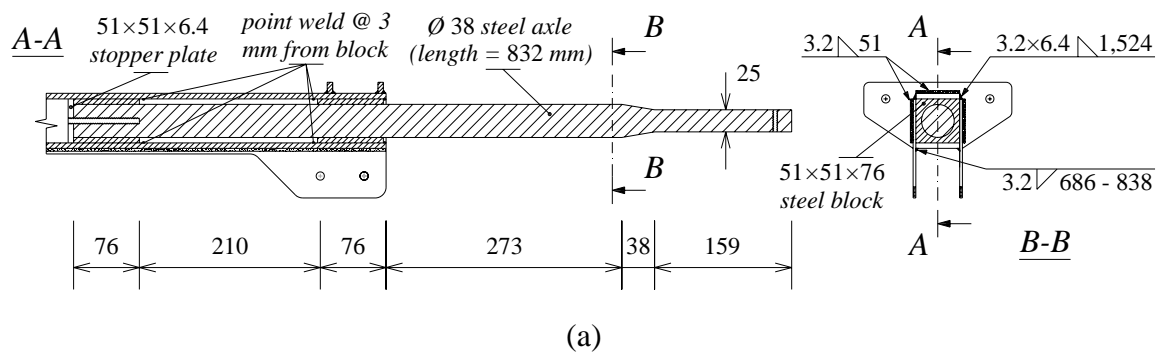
Assembly of fillet welded built-up steel support member and pneumatic axles: (a) longitudinal section view (not to scale, dimensions in mm); (b) close up; and (c) obstacle by-passing during installation of optical fiber circuit under Bridge A6358.
